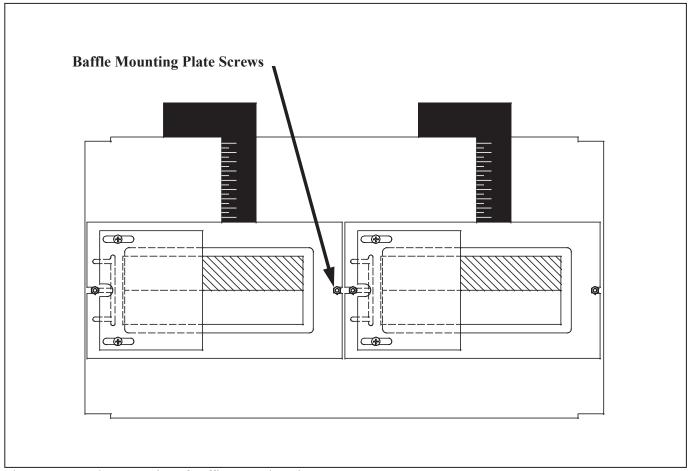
Squaring Top Edge of Baffle Mounting Plate
